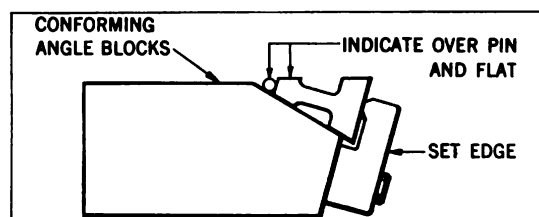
In checking result of preceding steps in a fixture, only one pin at nose is used.
